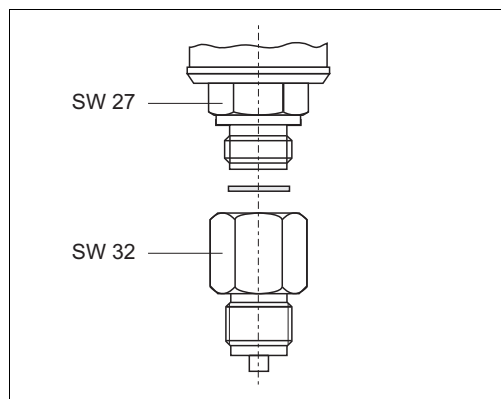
The flush-mounted version is screwed together with the adapter using a torque of 50 Nm. Screw the complete device into the process thread with max. 80 Nm (at AF 32).
